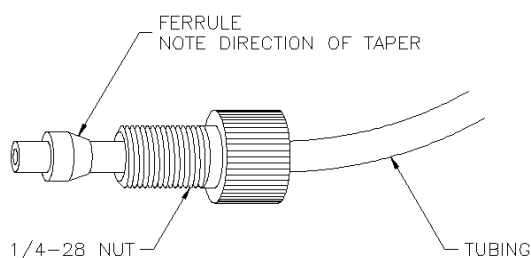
Assembly of 1/4-28 nut, ferrule and tubing for connection to degasser ports.
